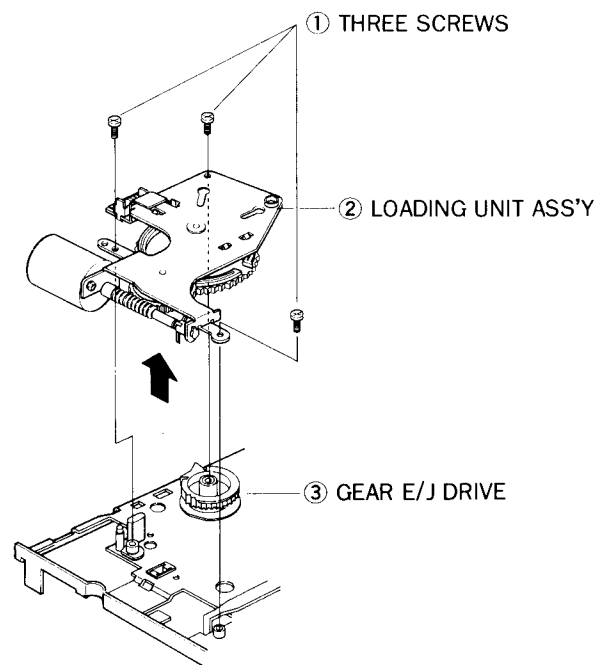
L/D Unit Ass'y & Gear Eject Drive Removal
